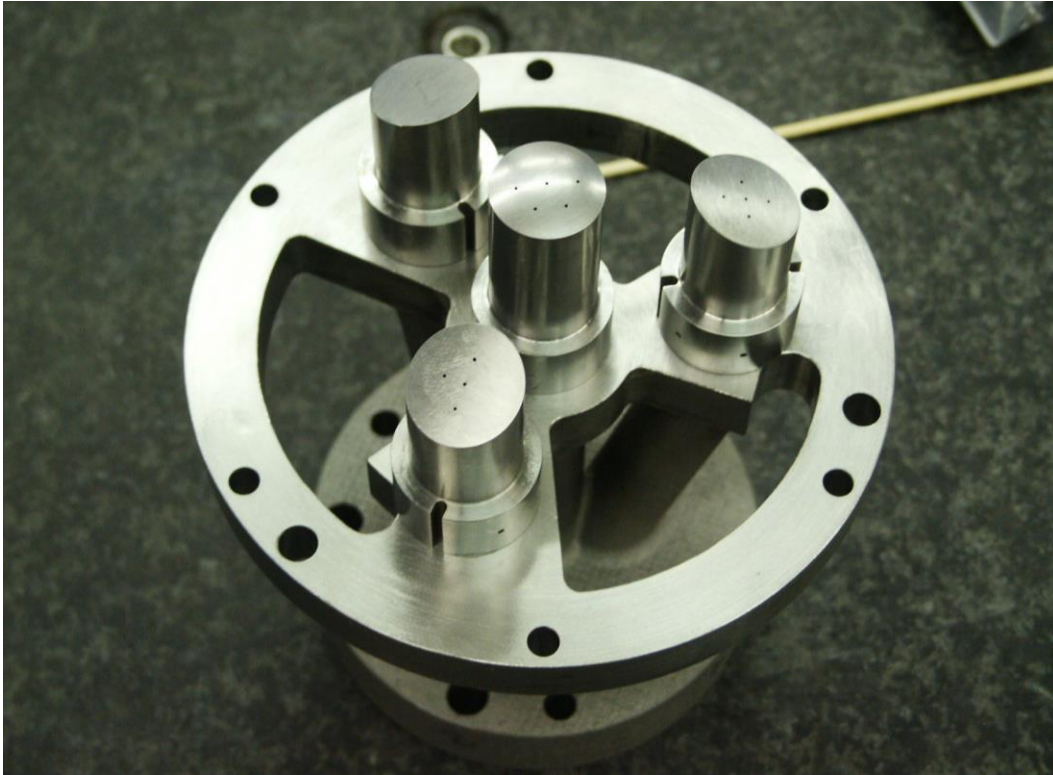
All four baseline plug inserts in the proper (seated) position.
